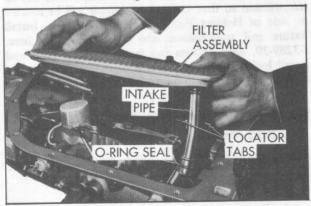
Removing Intake Pipe and Filter Assembly
